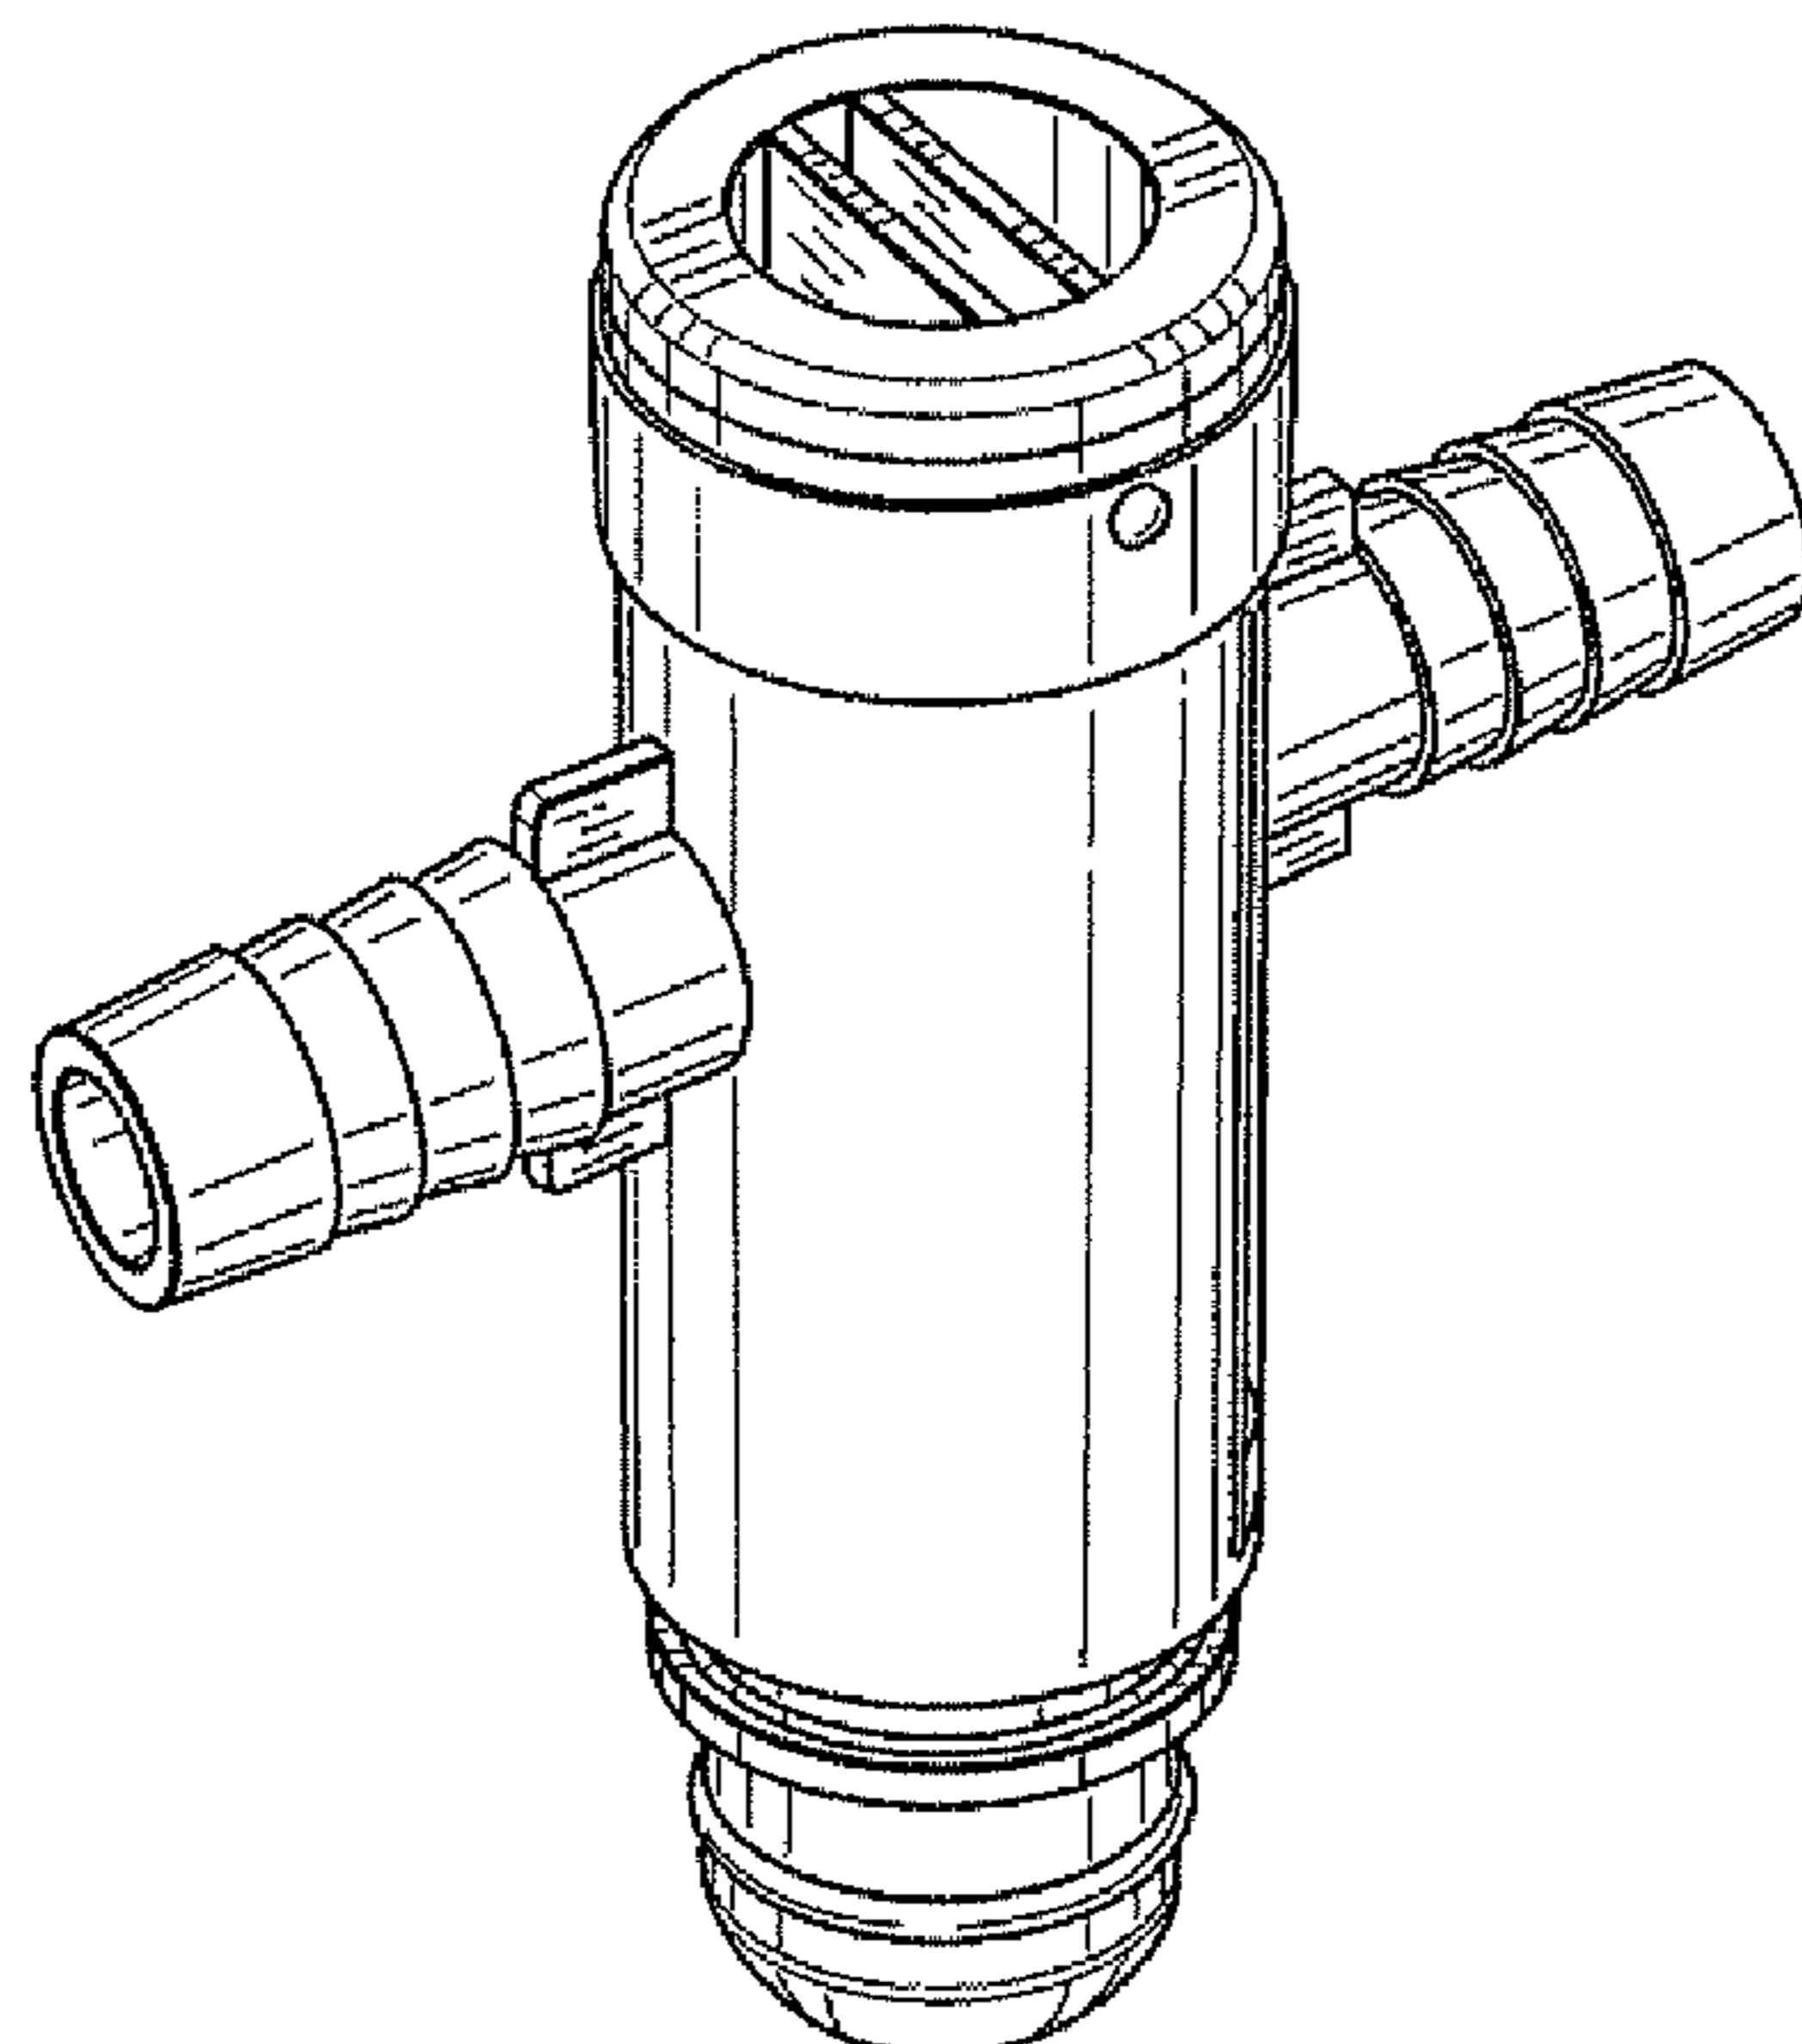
is a top perspective view of a slider valve fitment probe. FIG. 2 is a bottom perspective view of the slider valve fitment probe.
